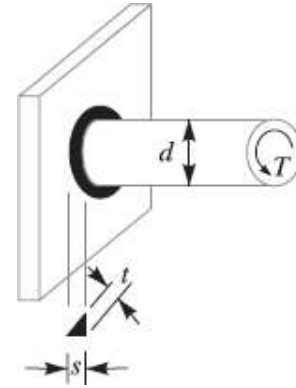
Circular fillet weld subjected to torsion.
